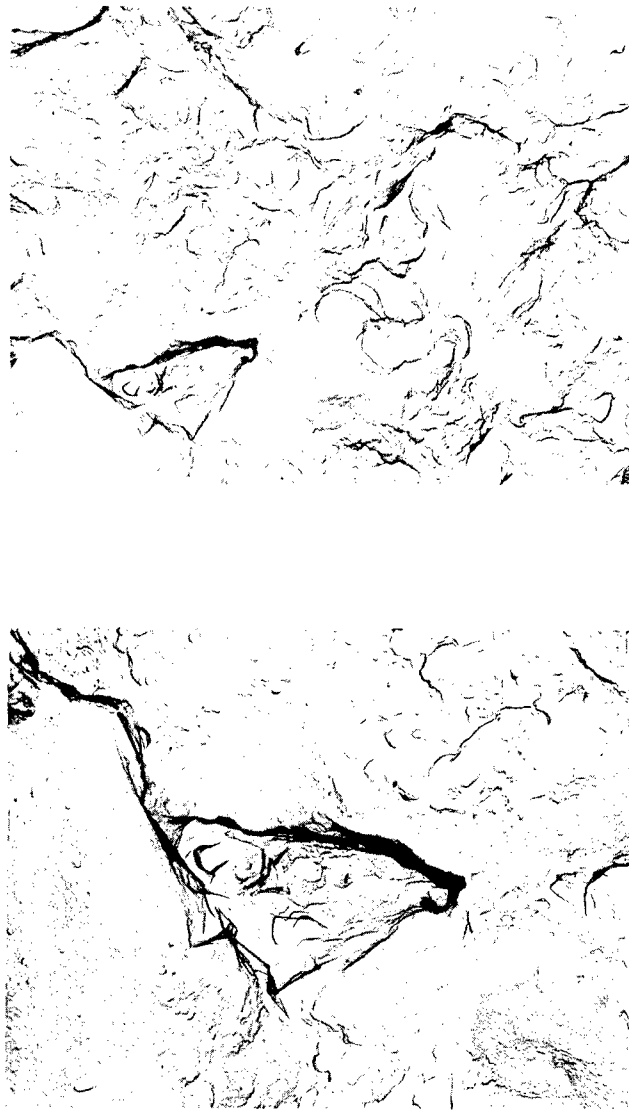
Electron Fractographs of Leaded Steel Showing a C Type Fracture in the Proximity of One of the "Fish-Eyes" Which Appears Intergranular in Nature. (Top, 2,000X; Bottom, 4,000X)
